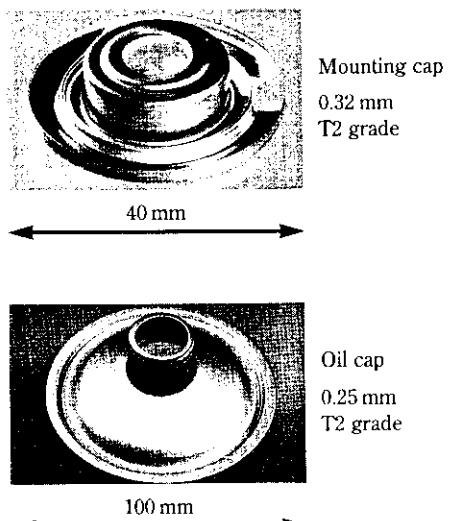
Examples of formed parts using formable thin-gauge steel sheets
